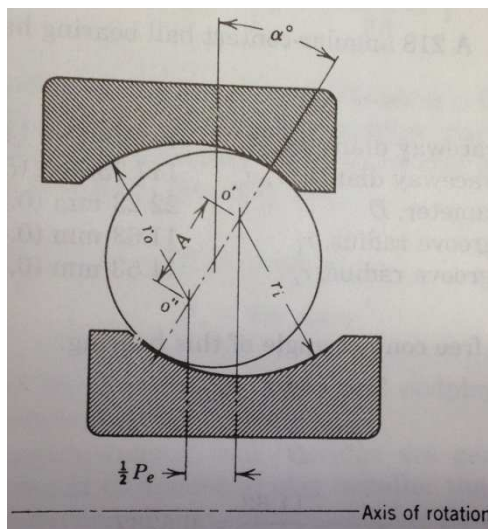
Cross-section of radial ball bearing with contact angle [15].
